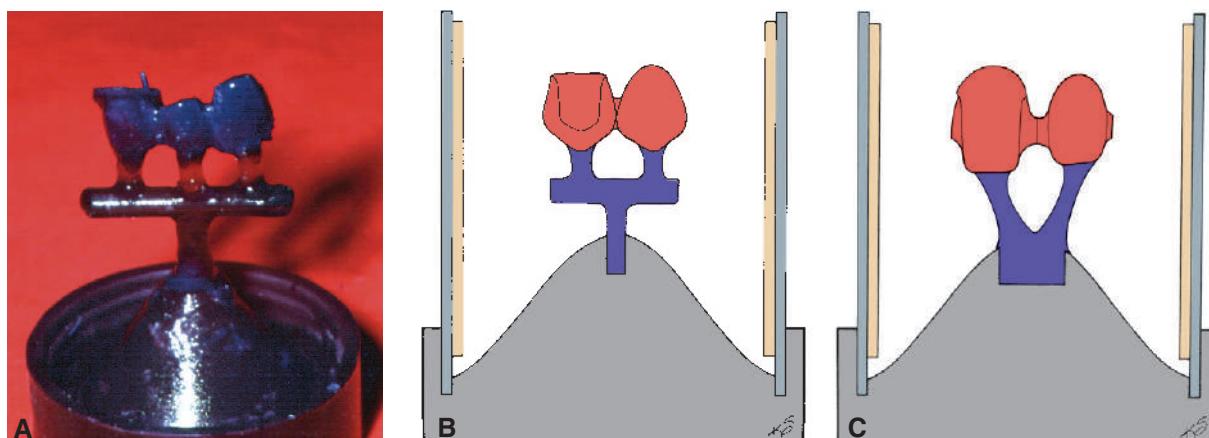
Sprue technique with multiple units. For more than two castings, a runner bar is used (A). For two castings, a runner bar may be used (B), or each casting may be fed through separate sprues (C).
